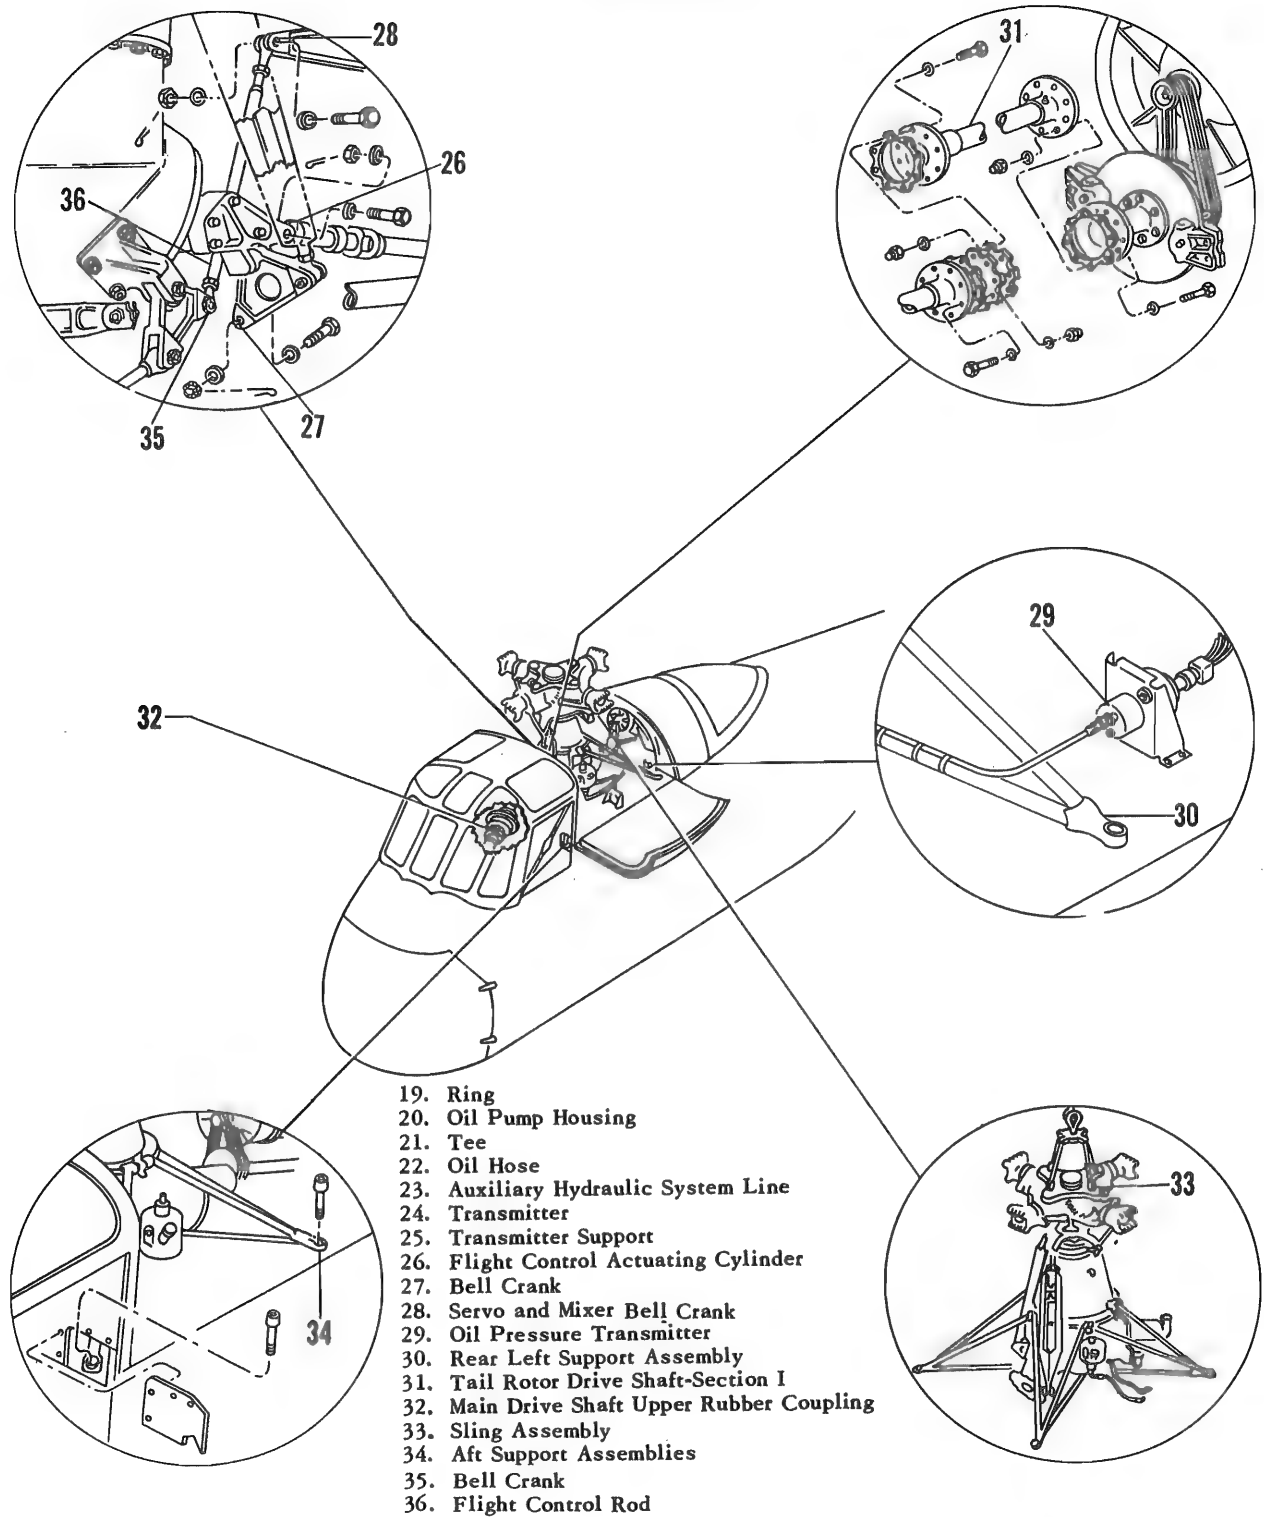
Main Gear Box and Rotor Quick Change Unit Removal (Sheet 2 of 2)
